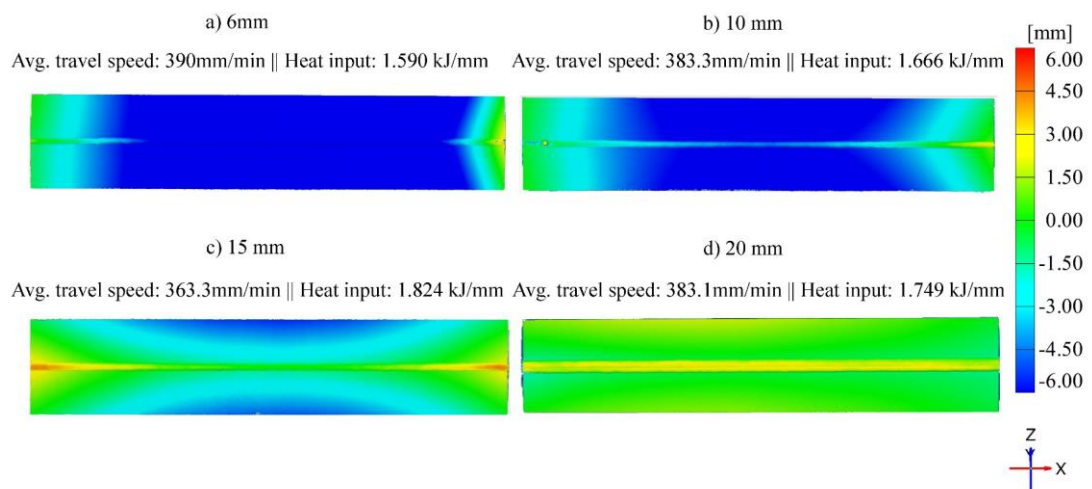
Distortion shapes of welded plates and weld parameters.
